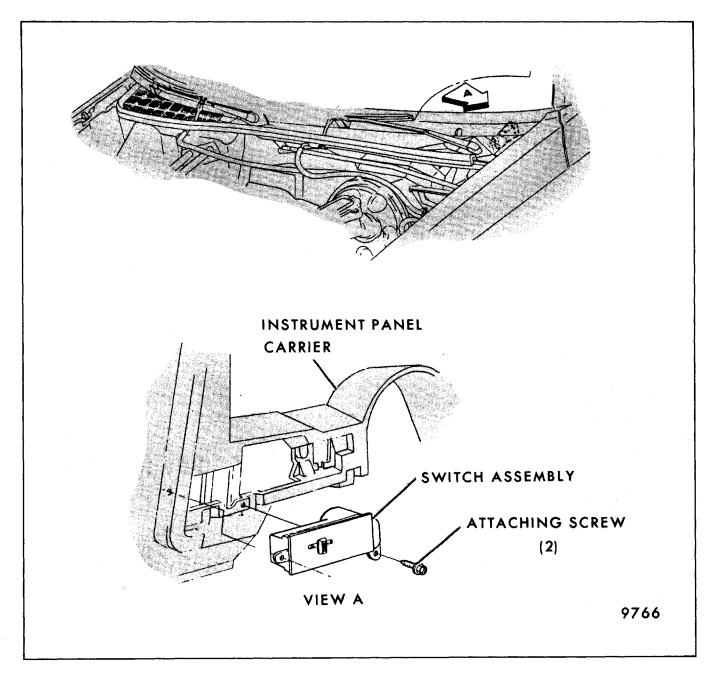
Windshield Wiper Switch Installation - Pontiac A Styles
